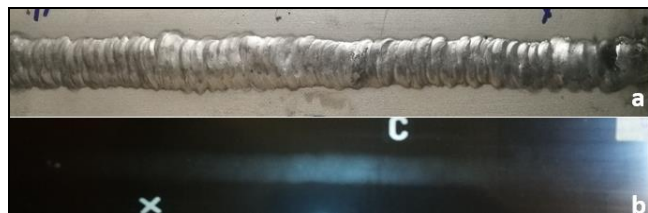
Photographs shows (a) general appearance and (b) X-Ray Radiography of joints welded by GTAW technique using 140 A and 19 V.
